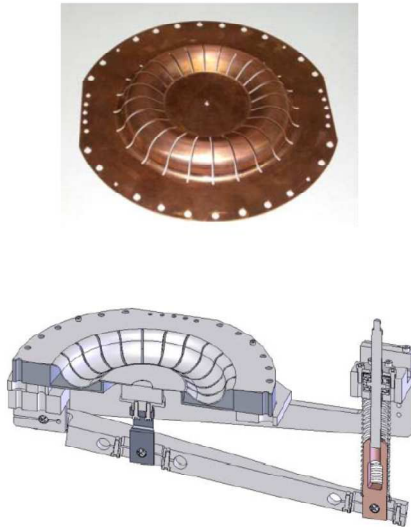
New tuner assembly. Top: Cu prototype of the slotted tuning plate.
